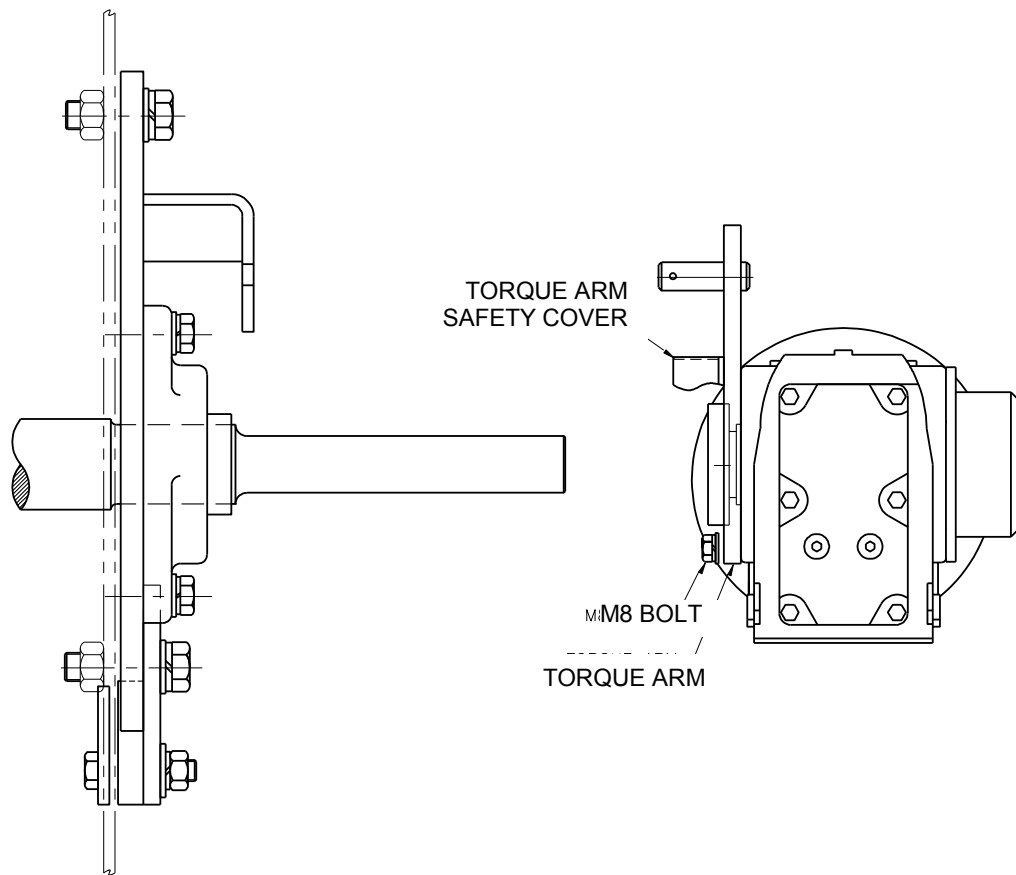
Disconnecting the Torque Arm from the Brush Drive
